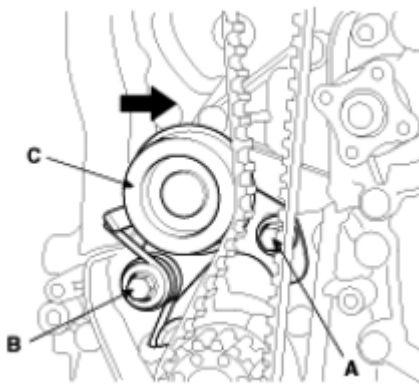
Locating Tensioner Pulley And Mounting Bolt
